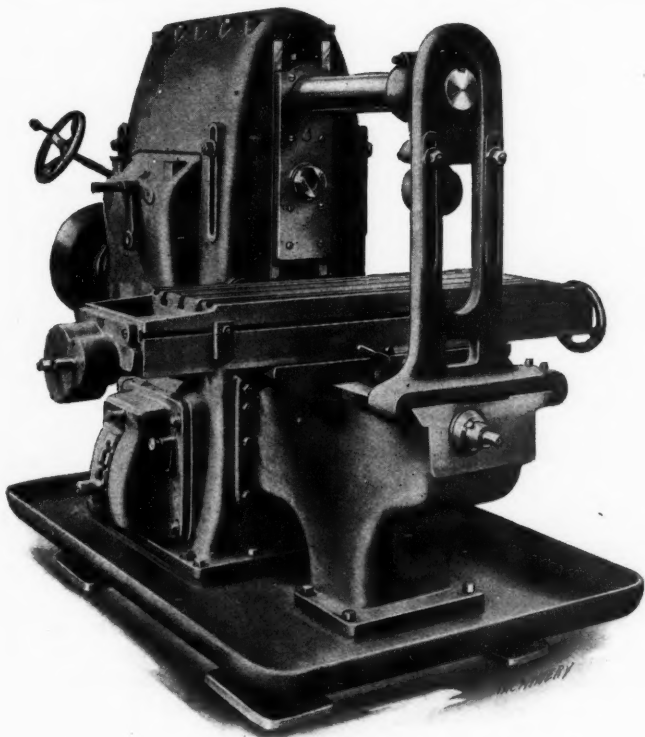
No. 6 Manufacturing Milling Machine built by National Transit Pump & Machine Co.
